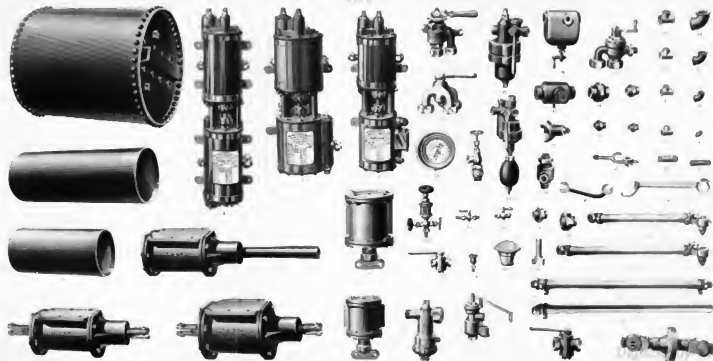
shows the various parts used to form complete sets of brake apparatus for either the automatic or the non-automatic system, a number of these parts being illustrated in detail in subsequent sheets. This company furnishes all brake apparatus in accordance with the terms and prices stated in the form of agreement printed herewith, and this plate shows all the articles enumerated in the various schedules of the agreement, as well as a few special parts used in exceptional cases.
